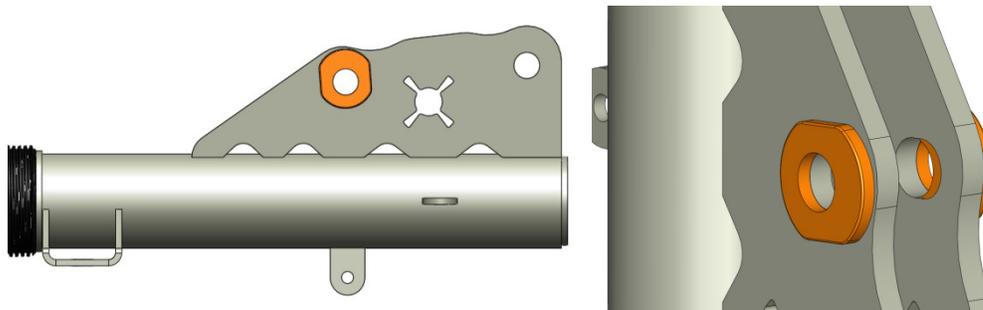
SMG Strut Housing with Camber Slug Installed.
